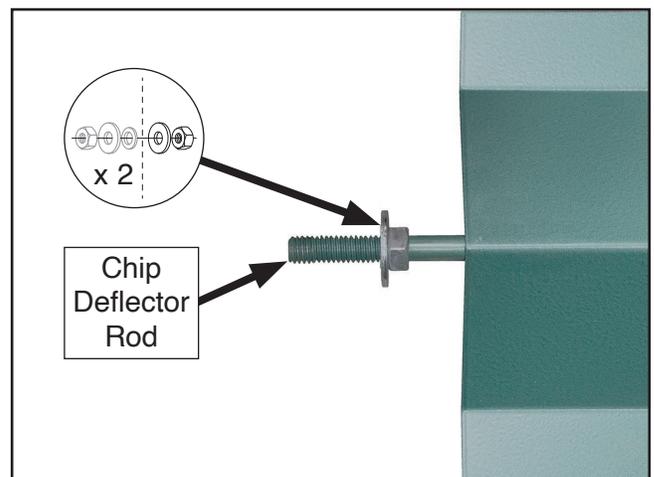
Inside hex nut threaded all the way back on chip deflector rod (front end shown).
